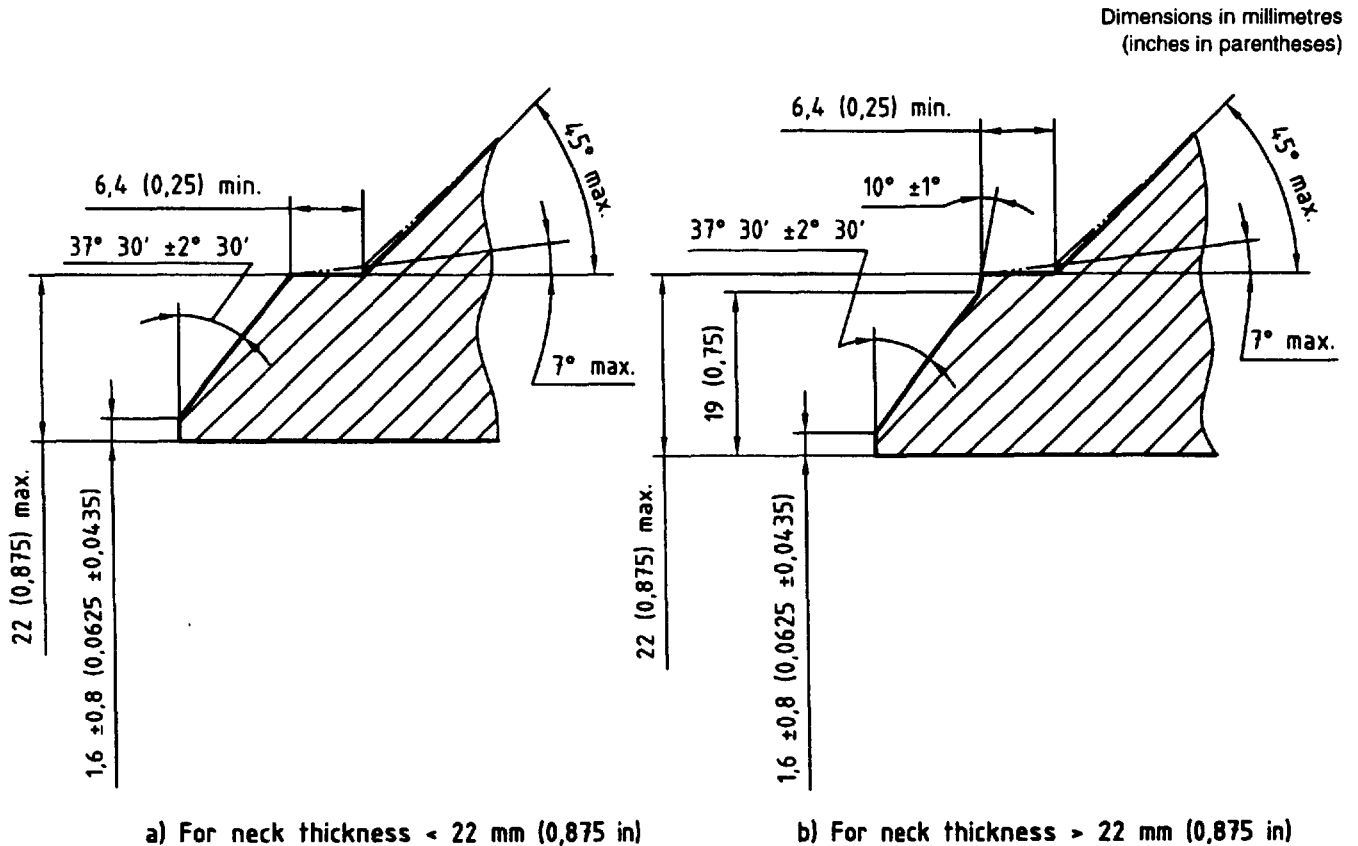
Weld end preparation for type 17SS and 17SV weld neck flanges
